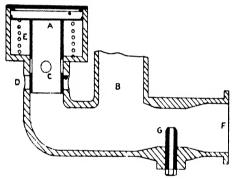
Carburetter with automatic extra-air inlet.
